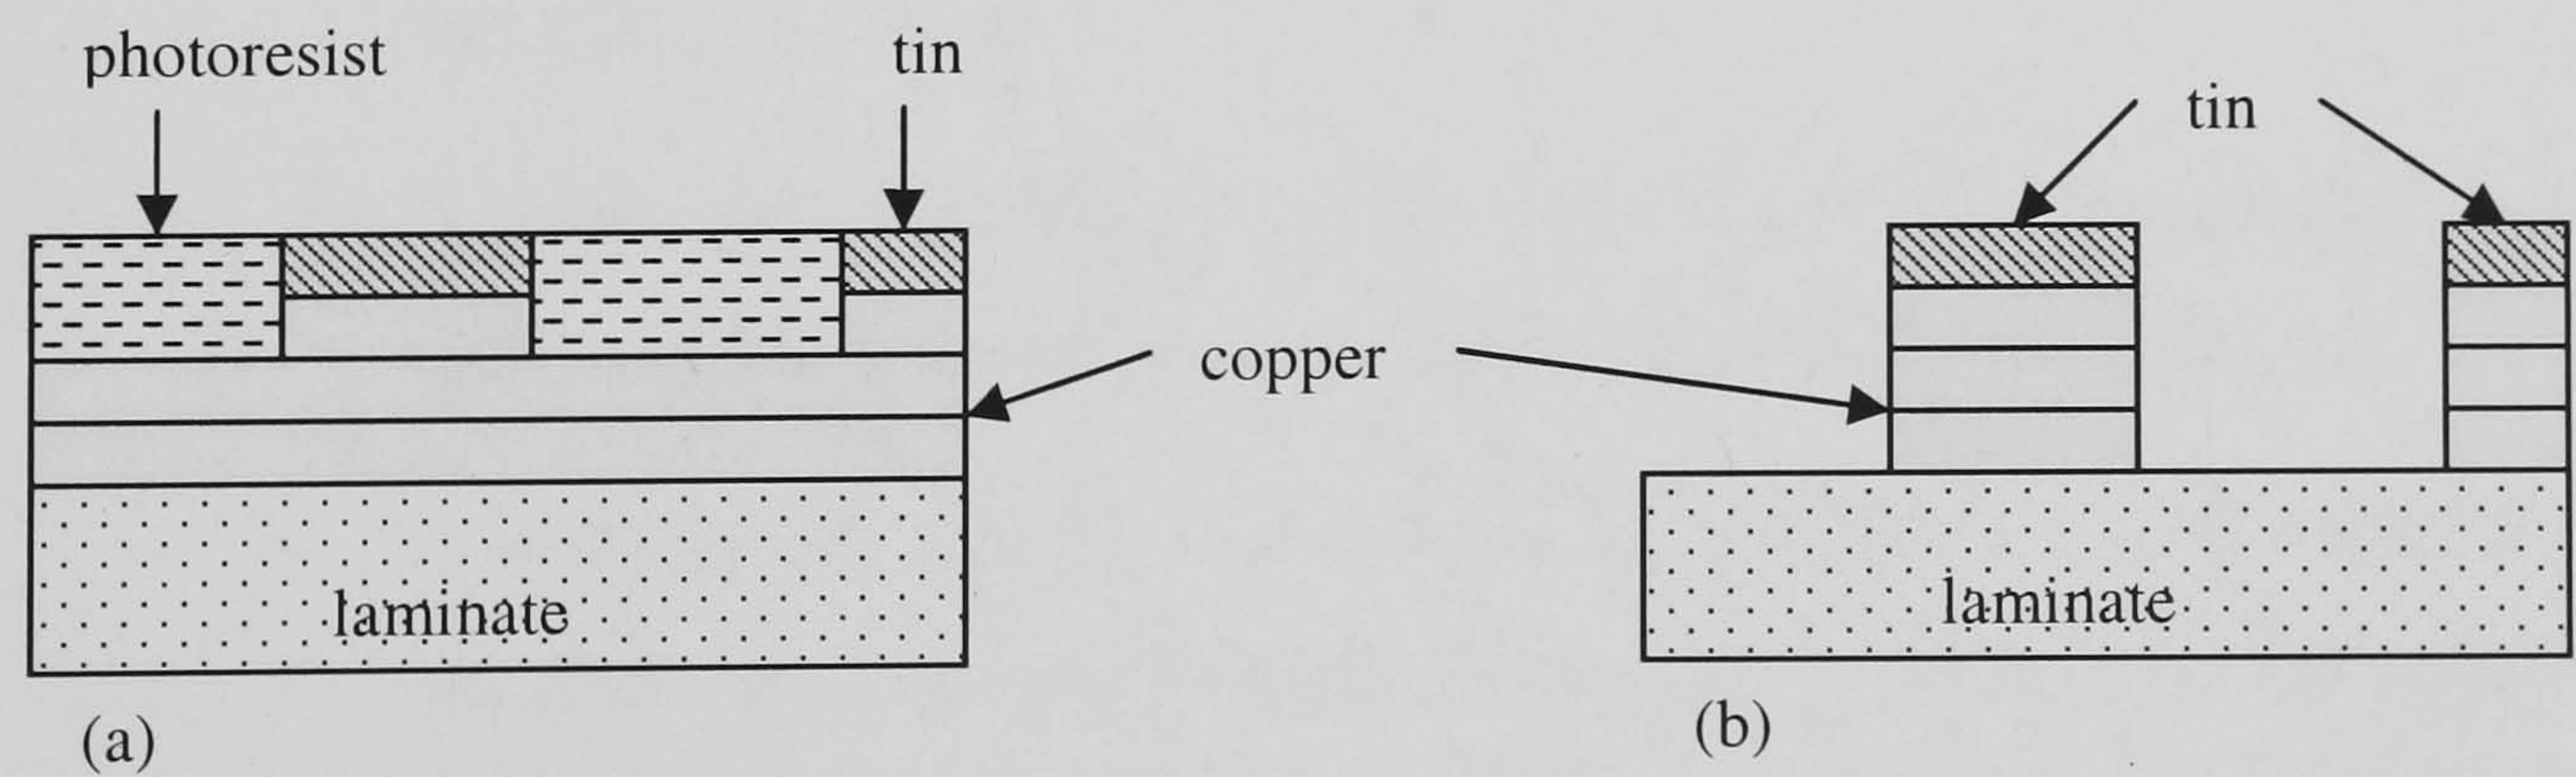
(a) PCB after tin electrodeposition; (b) After photoresist removal and copper etching
